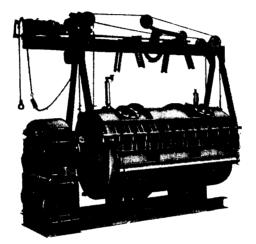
High-temperature jig dyeing machine (Courtesy of F. Smith (Whitworth))
